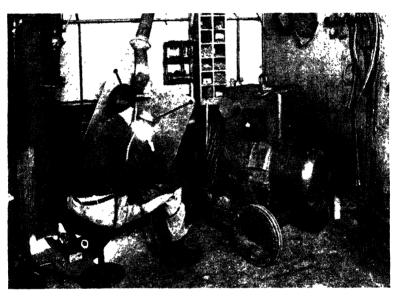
A typical arc welding booth using a turn table, a flexible exhaust vent, a storage rack for electrodes and a D.C. welding machine equipped with an automatic start and stop control. Note the welder's protective clothing (Courtesy of: DV Welding Controls)
